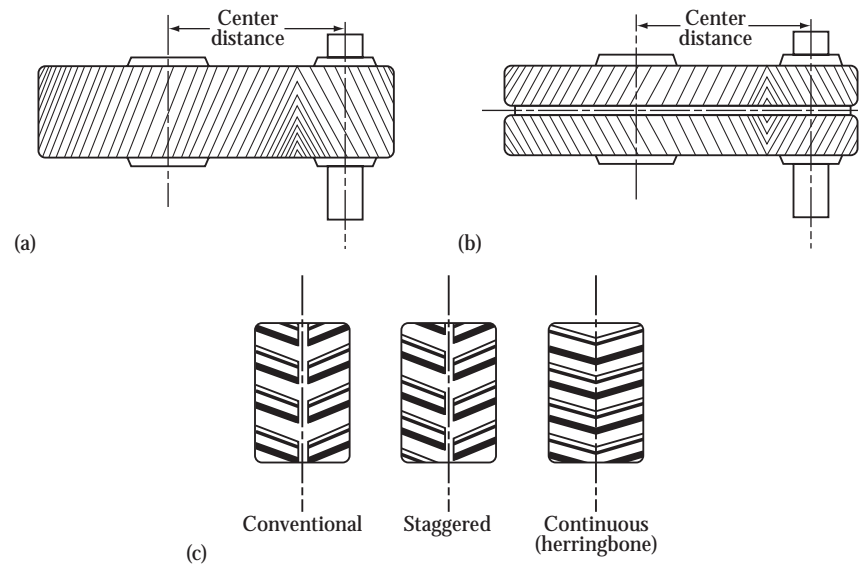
Types of helical gear teeth: (a) single helical and (b) double helical; and (c) types of double helical.
